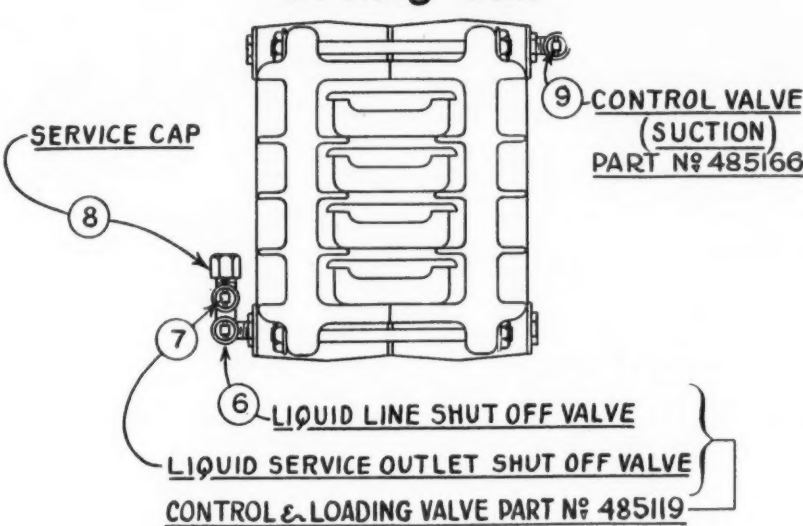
Cast-iron ElectrICE cooling unit showing suction and liquid valves.
